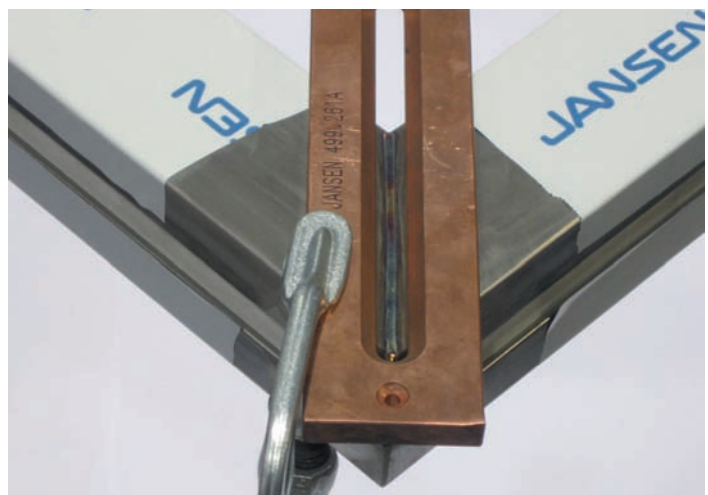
Clamp the copper welding gauge firmly in place
